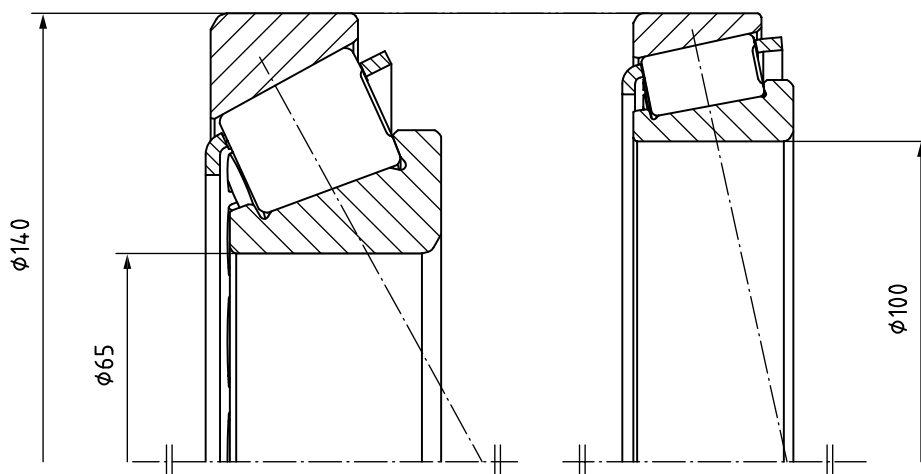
Example cross-section of radial tapered roller bearings with the same outside diameter
